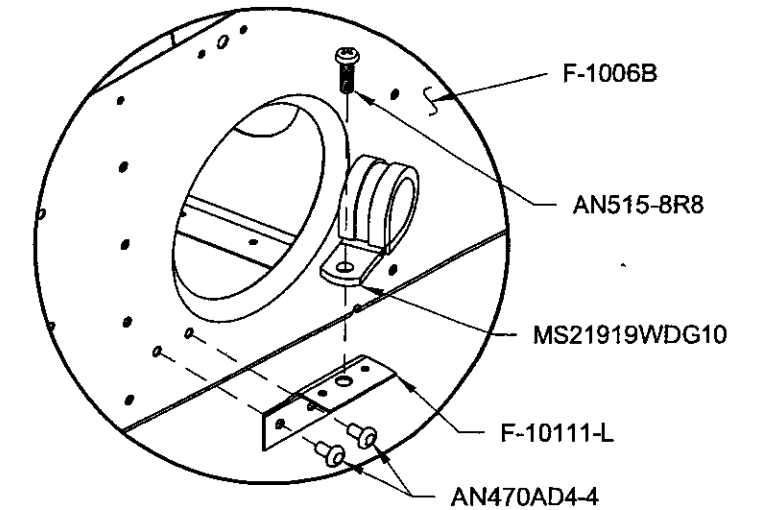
ATTACHING THE BRACKET AND CUSHIONED CLAMP
